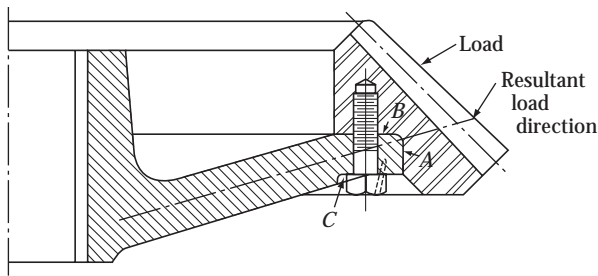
Webless-type miter gear—counter-bored type.
